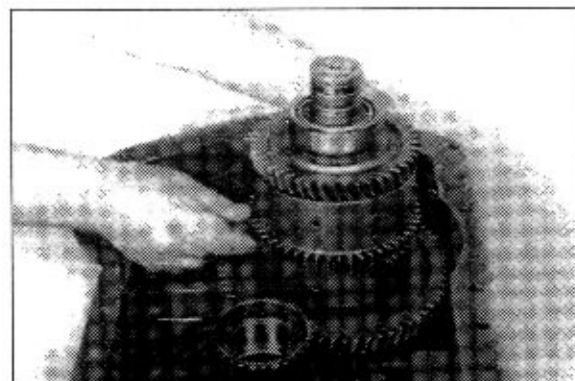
Plate clearance K3 should be  $1.50\sim 2.50\text{mm}$ .
